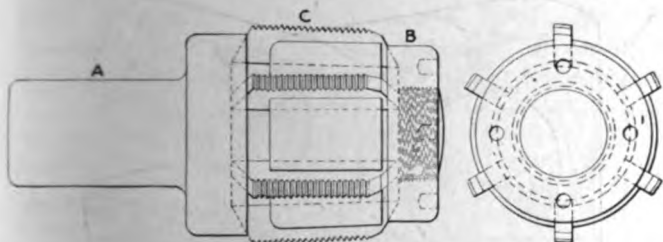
SOLID ADJUSTABLE INSERTED-BLADE TAP
